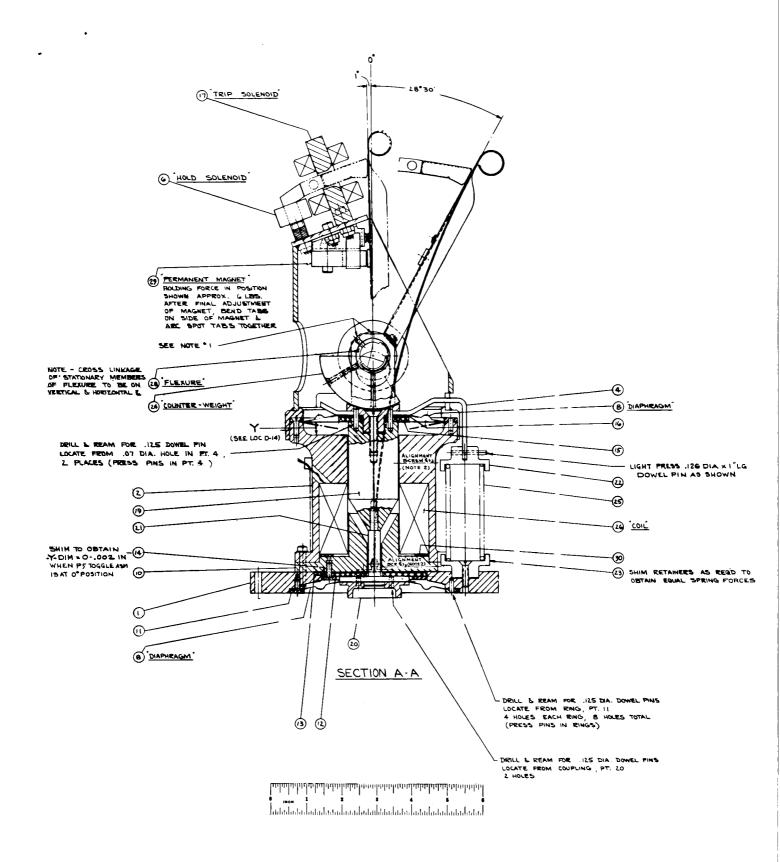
Layout in Detail of Operating Mechanism (Actuator).
